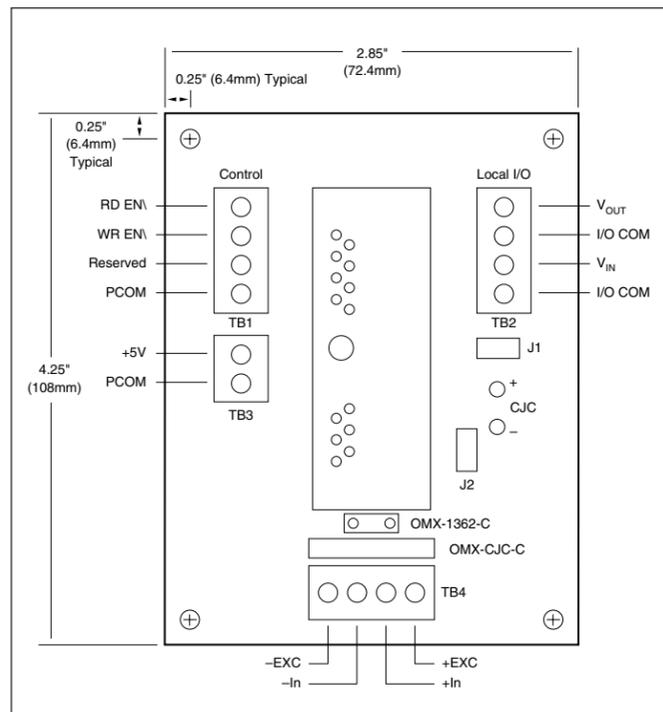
OM5-BP-SKT-C Evaluation Board Dimensions And Pin Layout.
